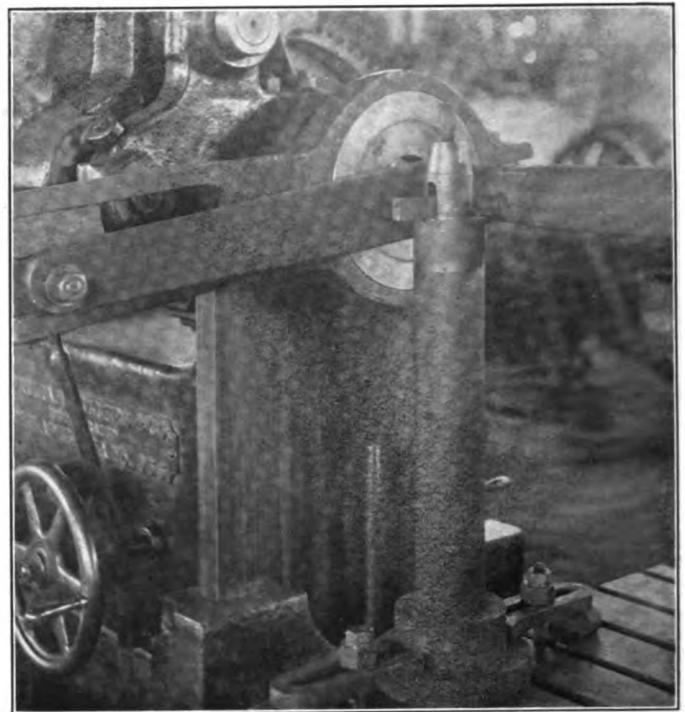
Tool Post Used on Horizontal Boring Mill for Turning Tumbling Shafts.
